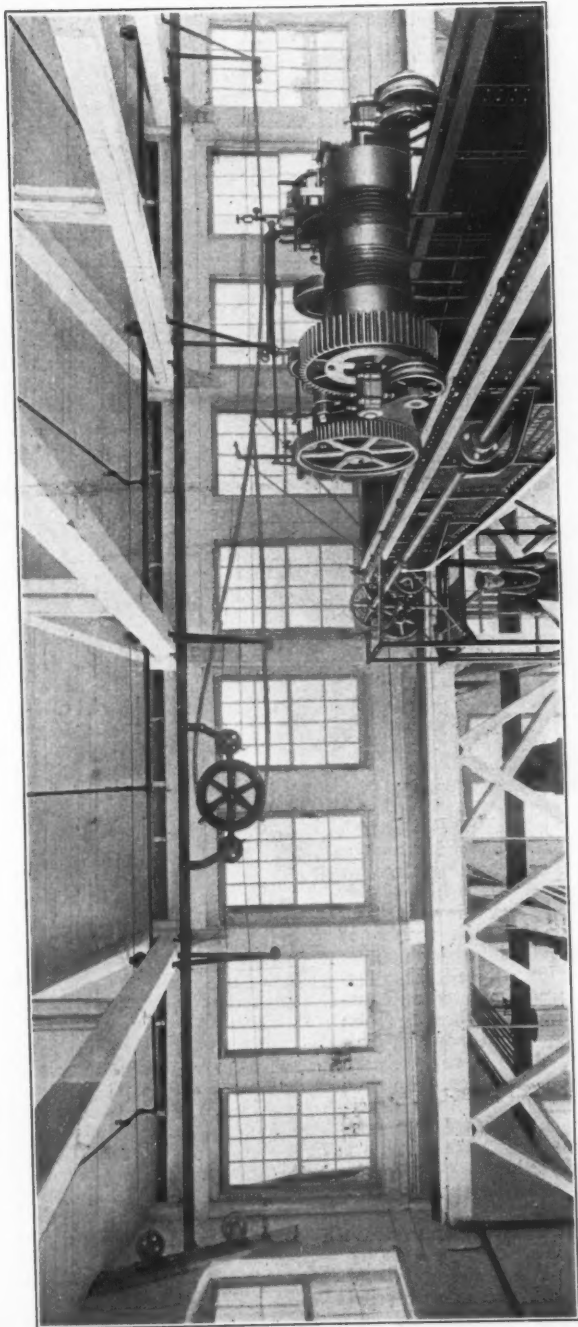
COMPRESSED AIR CRANE HOSE SUPPORT.
